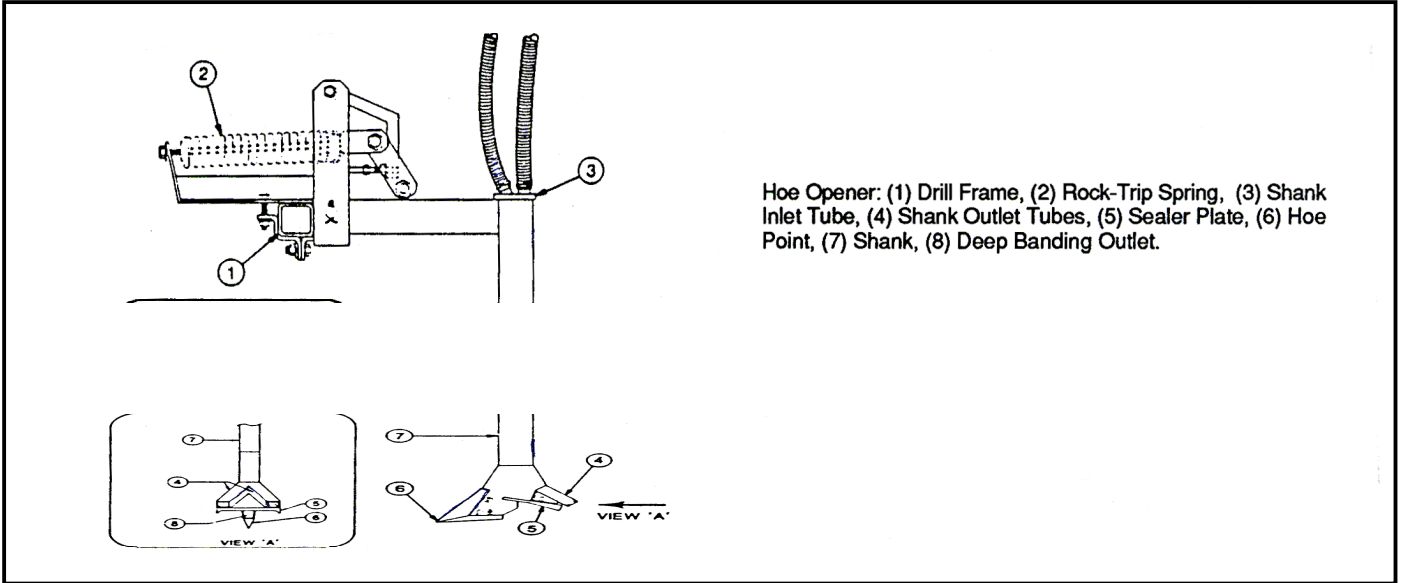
Typical Zero Till Hoe Drill Opener Assembly
